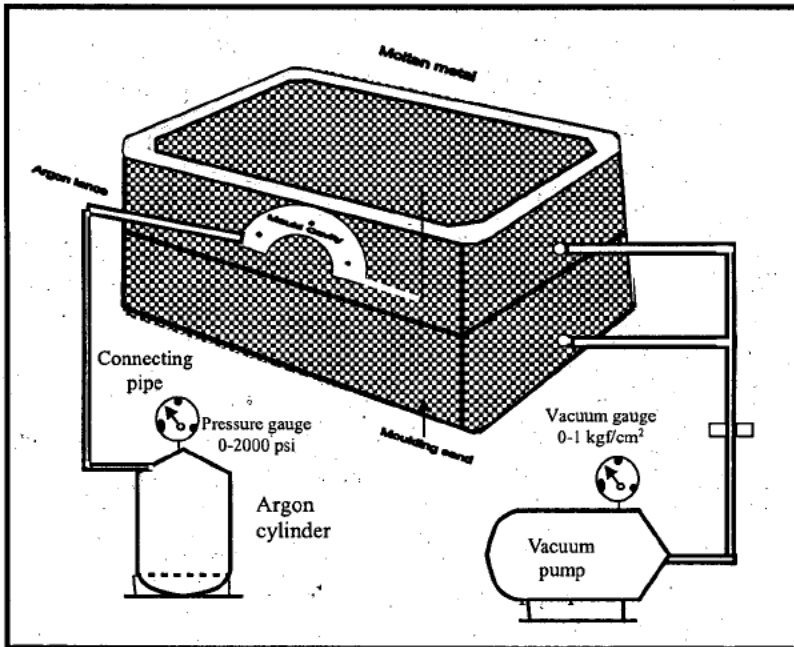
Outfit used for casting of Railway Wagon Brake by imposing vacuum ('depression') through double lined cope & drag and super imposing Argon while pouring.
